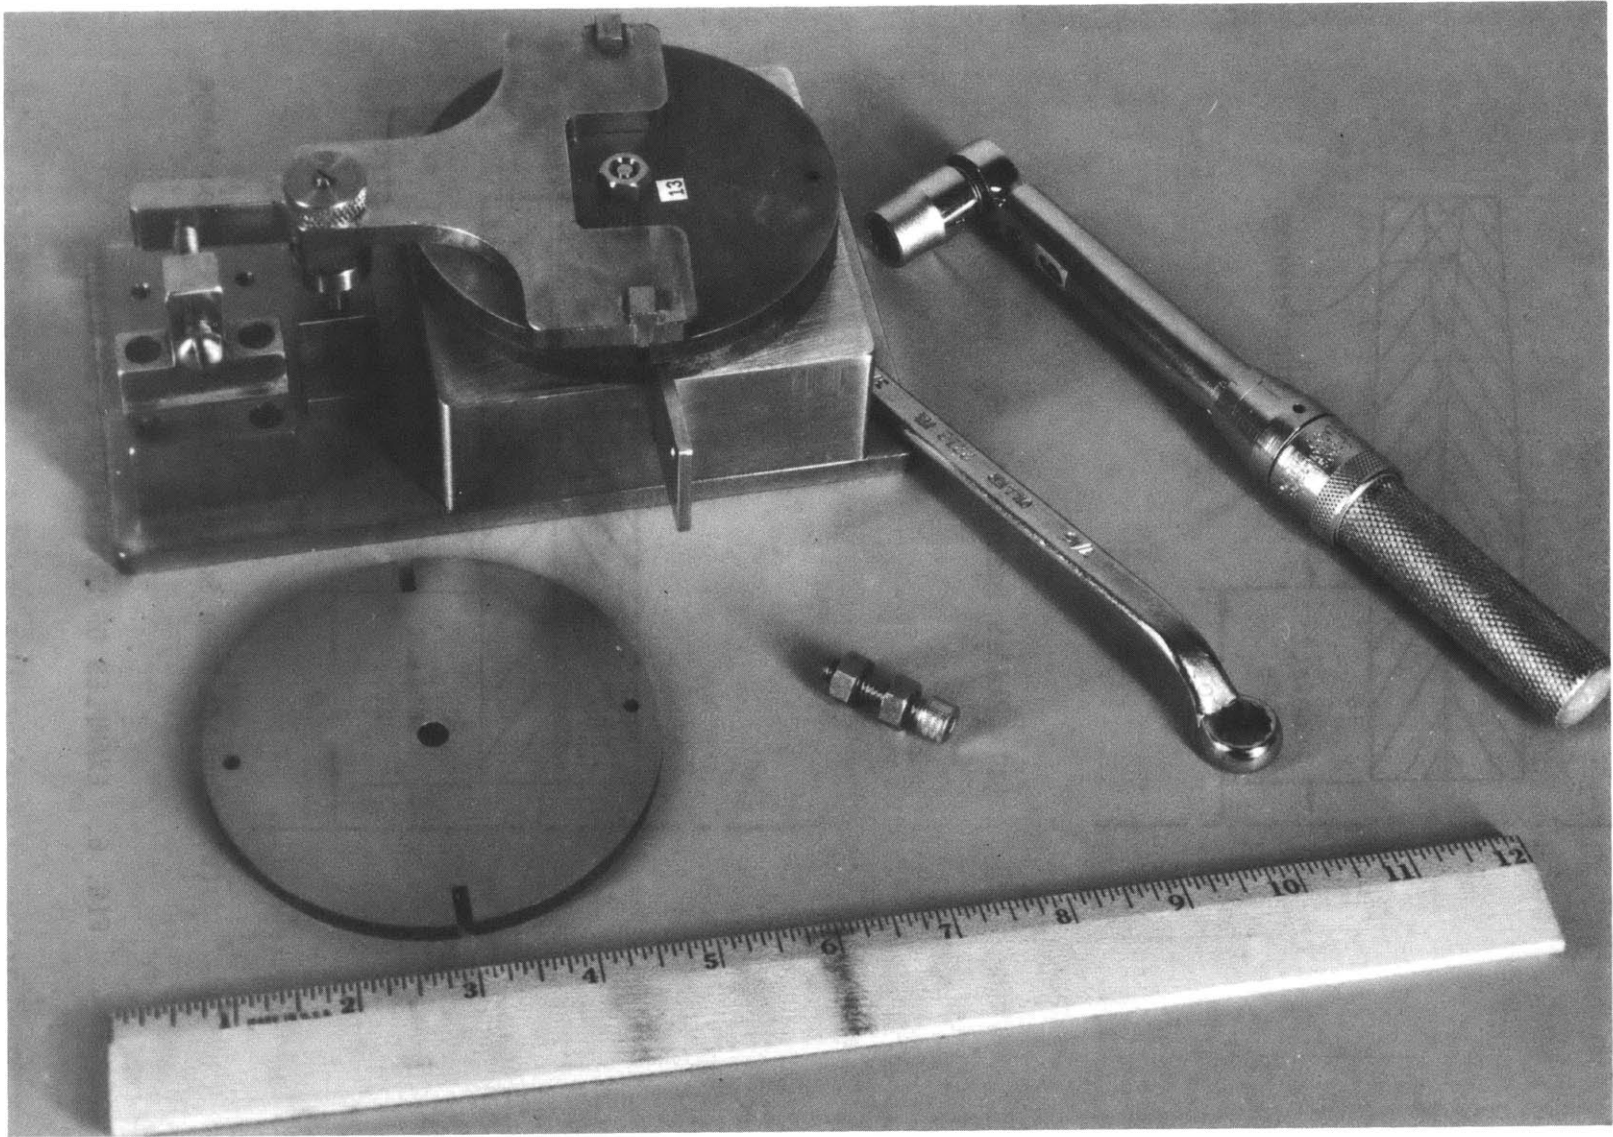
PLATE SPECIMEN, BOLT AND NUTS, FIXTURE AND TOOLS.
